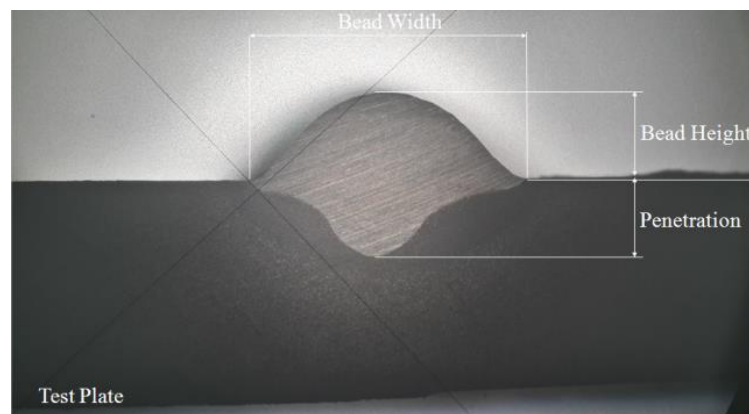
Schematic representation of weld bead geometry parameters measured in GMAW-P
